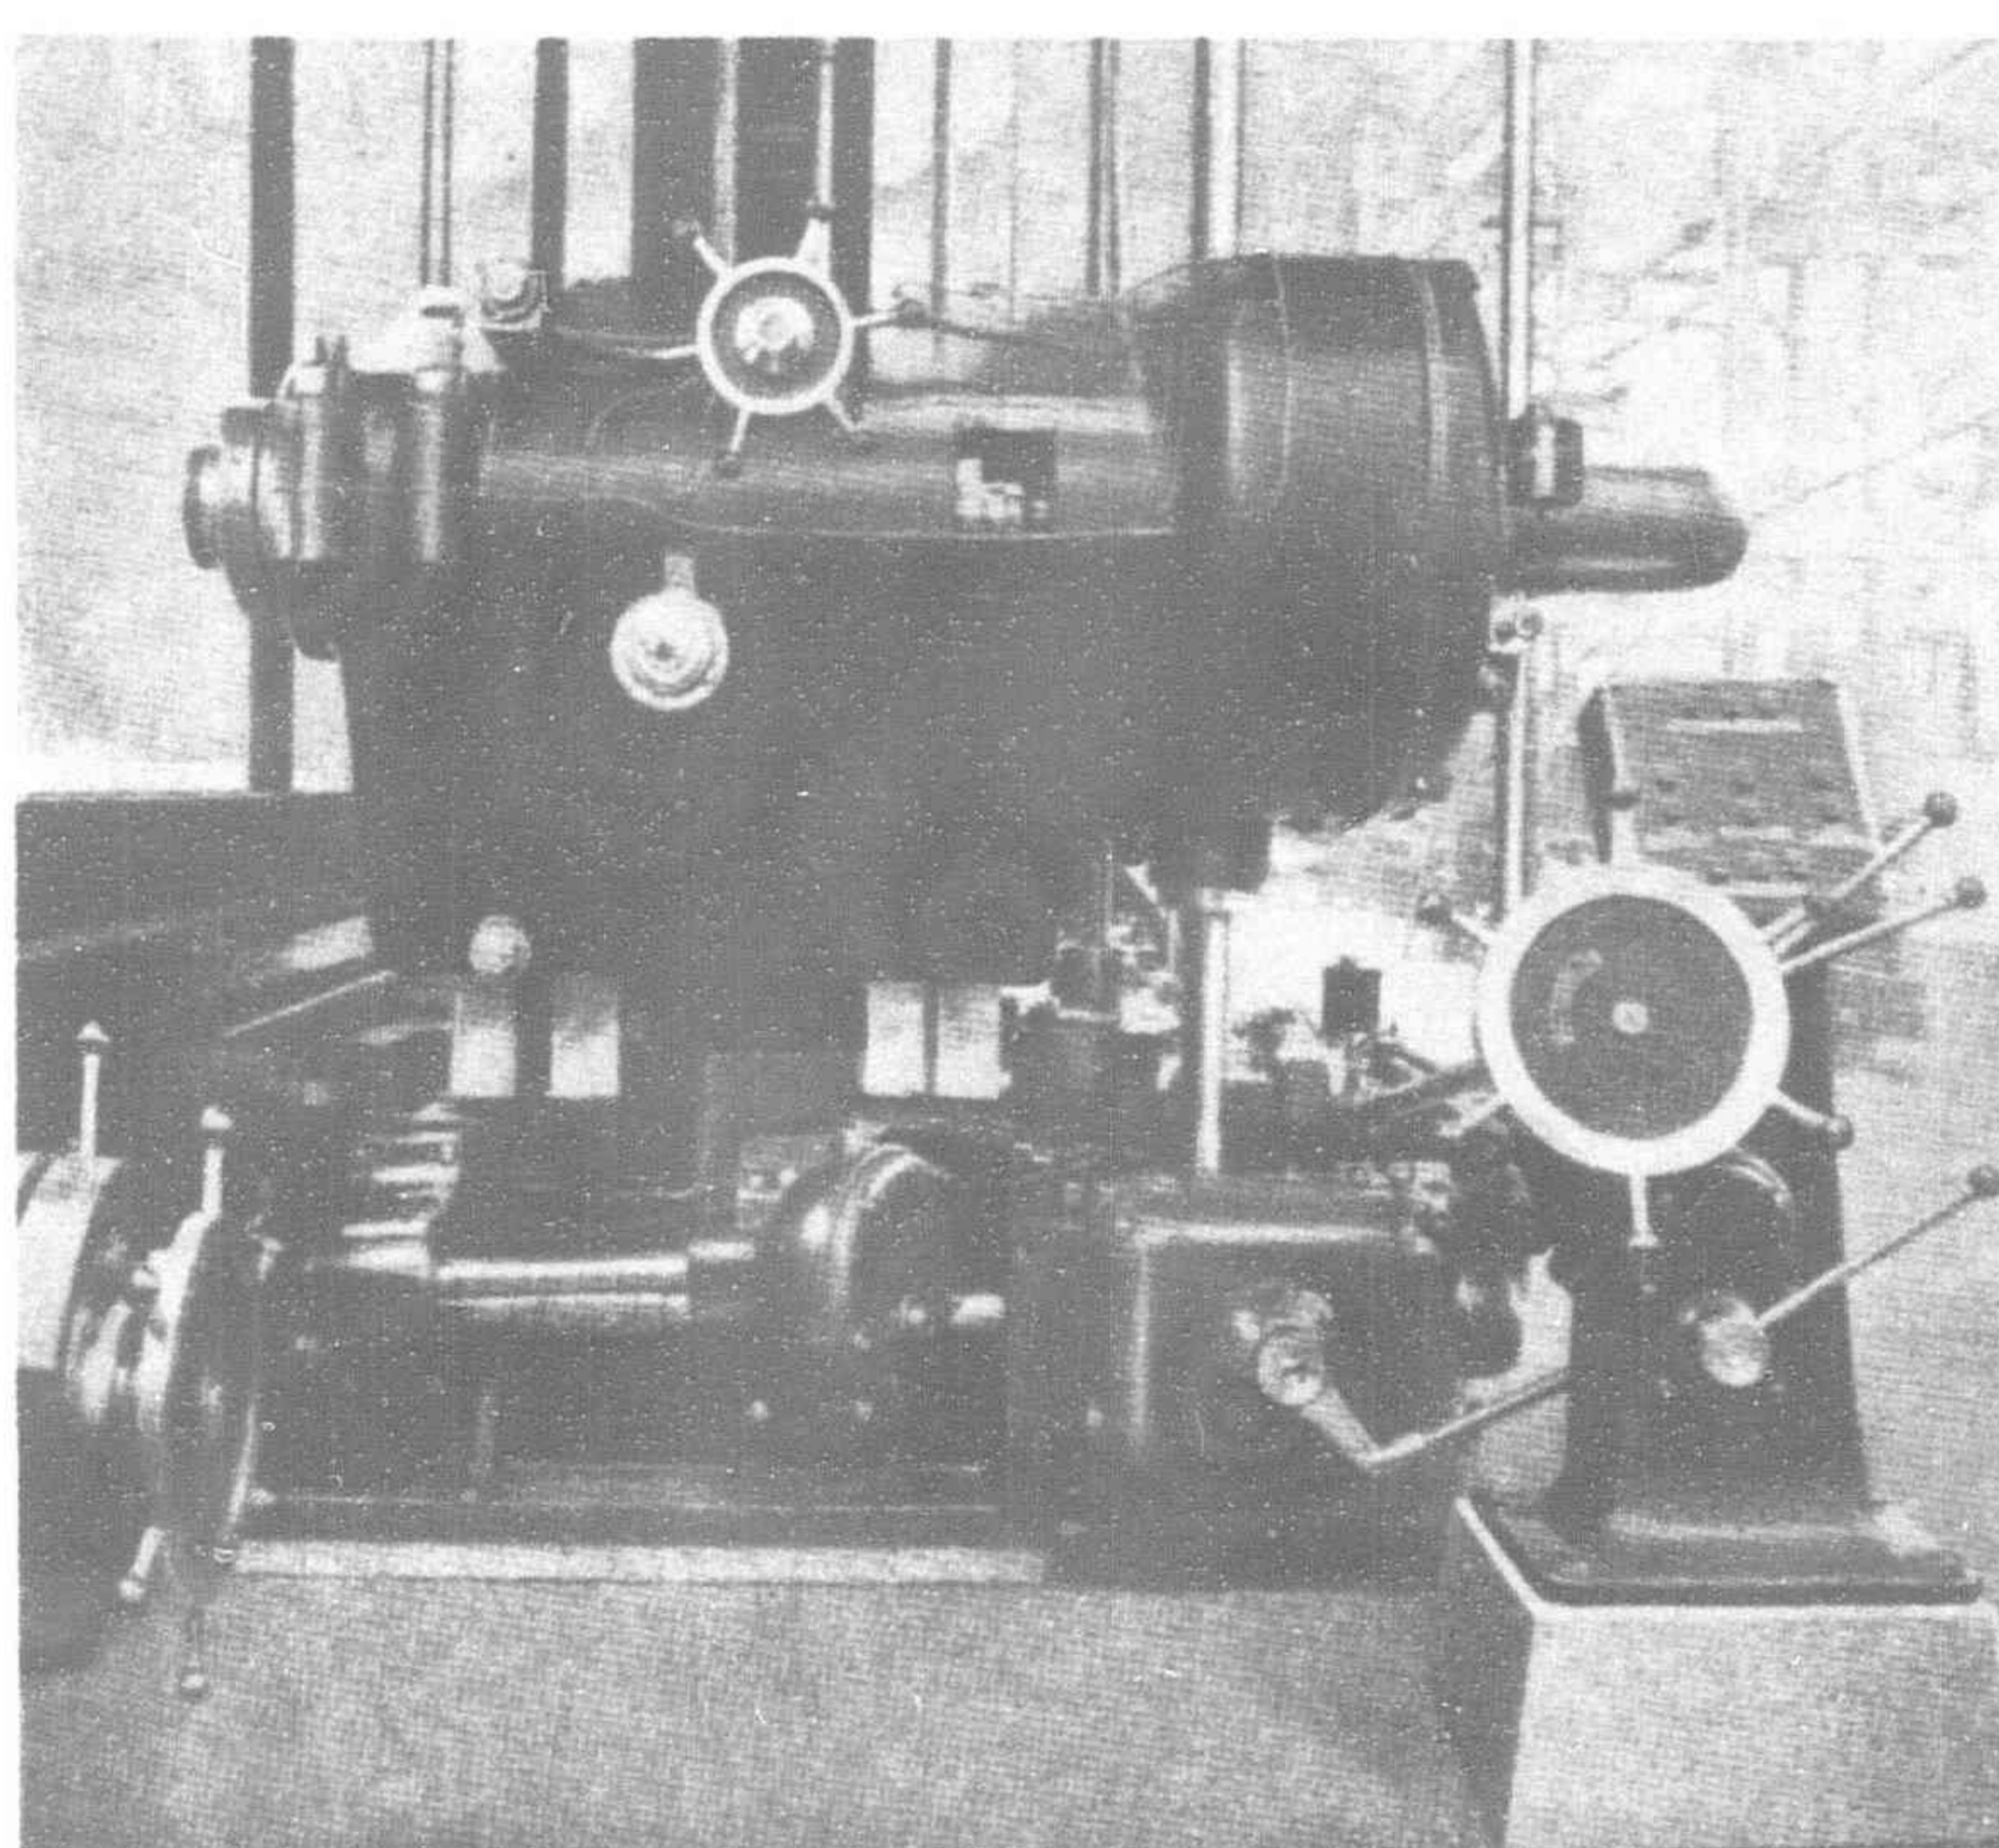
A Close-up view of the Control Gear and Operating Panel, also the Right Hand Horizontal Saddle
